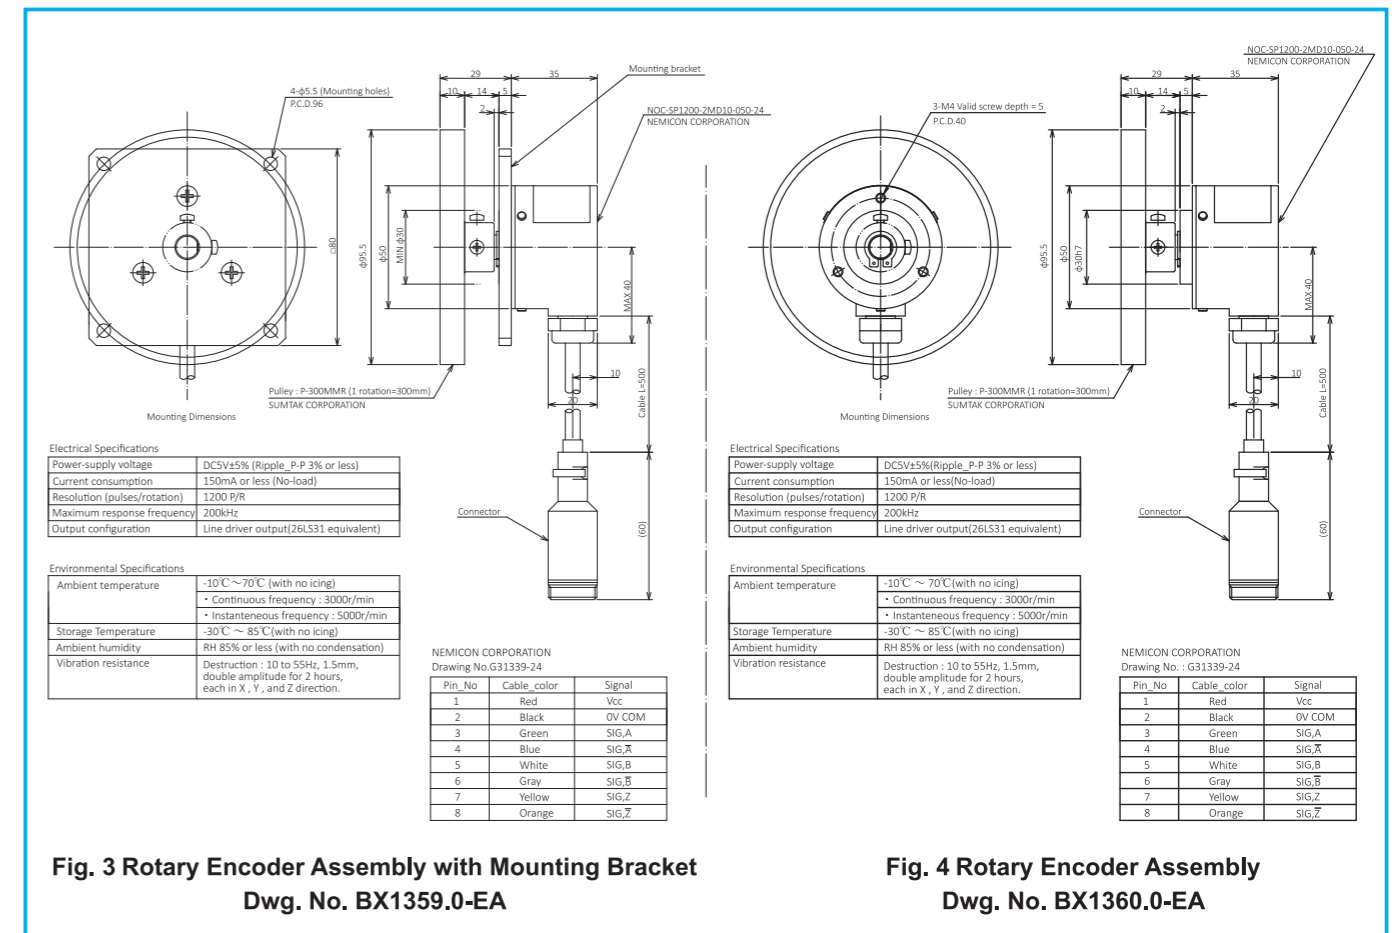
Rotary Encoder Assembly with Mounting Bracket Dwg. No. BX1359.0-EA
